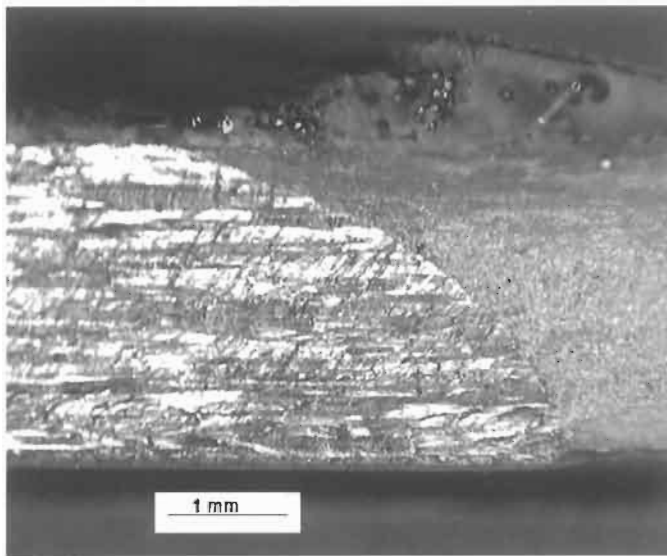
View of the tip of the crack in the thick end of the panel. The fatigue crack surface is the bright faceted region to the left and the deliberately broken surface is the mottled grey area to the right. Note the shape of the crack, much longer along the inside surface of the panel, indicating that a degree of bending was involved in the development of the crack. Also note that the fatigue crack surface is bright and highly detailed, and does not appear to have been rubbing [8].
